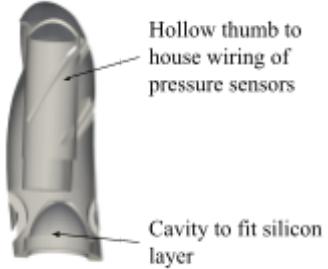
Silicone Socket Placement with Sectional view of Thumb Tip
